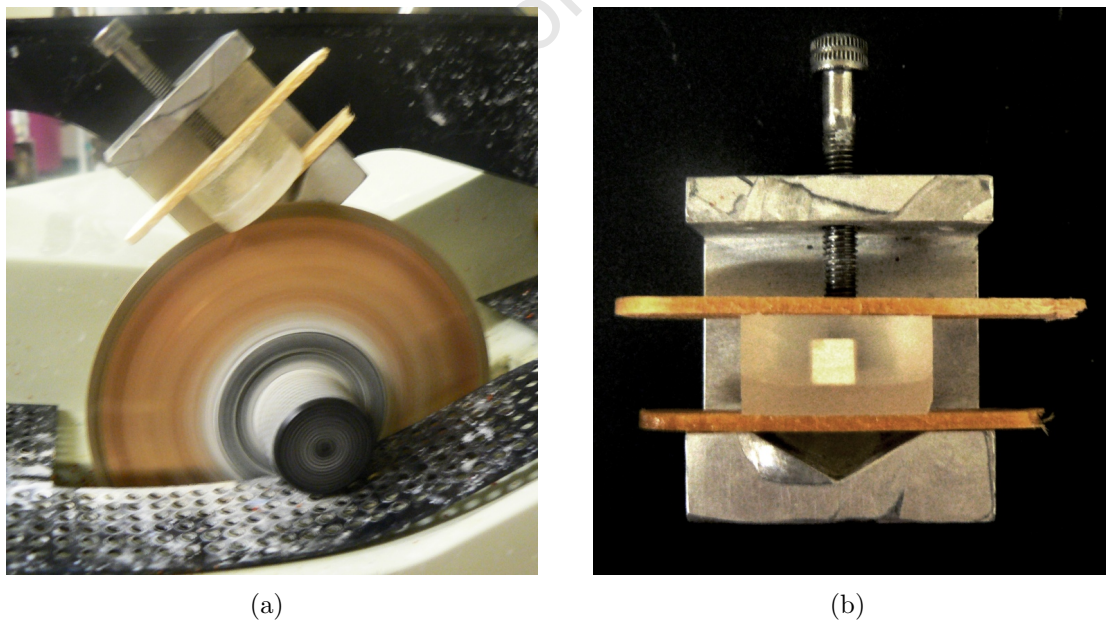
In this photograph (a) an embedded specimen is gripped firmly in a holding mount and sectioned with a rock cutter with a water-cooled-diamond studded blade. (b) A photograph of a holding mount with an embedded specimen sectioned at the desired location.
